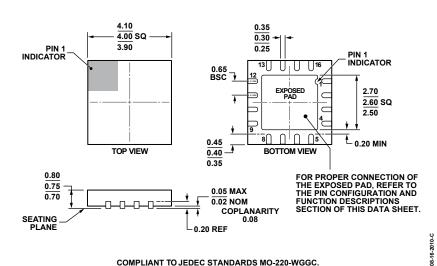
16-Lead Lead Frame Chip Scale Package [LFCSP\_WQ] 4 mm × 4 mm Body, Very Very Thin Quad (CP-16-17) Dimensions shown in millimeters
